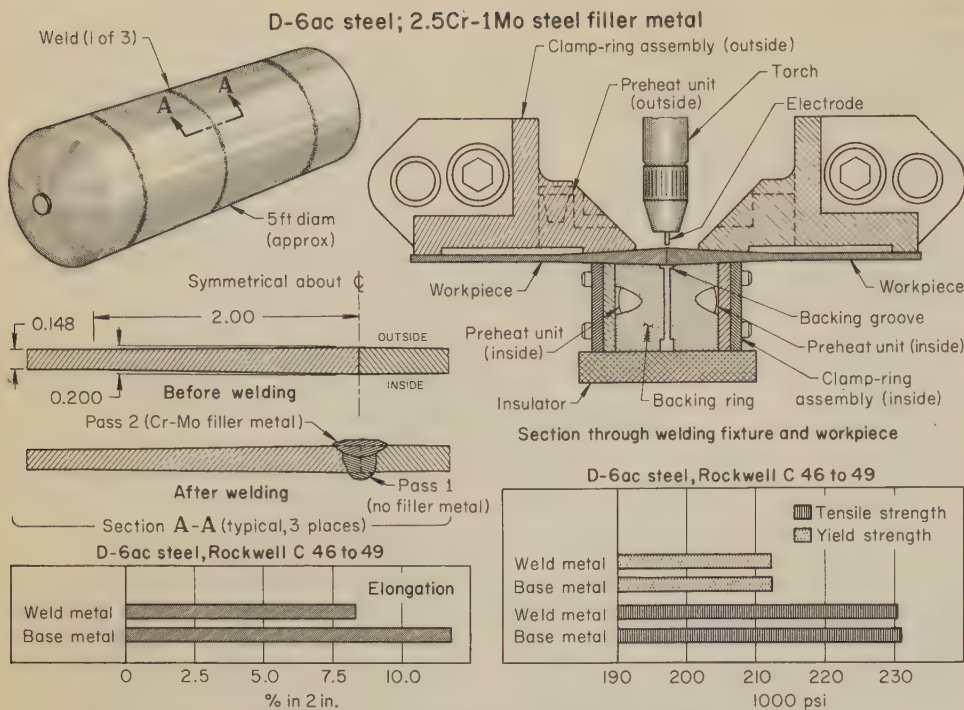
Rocket-motor case (upper left), showing three girth welds; (left center) joints before and after welding; (upper right) sectional view of welding fixture and joint in workpiece, with torch in position for welding; (bar charts) tensile properties of base metal and weld metal after heat treatment (Example 228)
